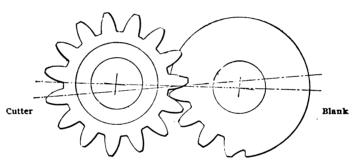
CUTTER WITH PARTIALLY DEVELOPED CUTTER.
